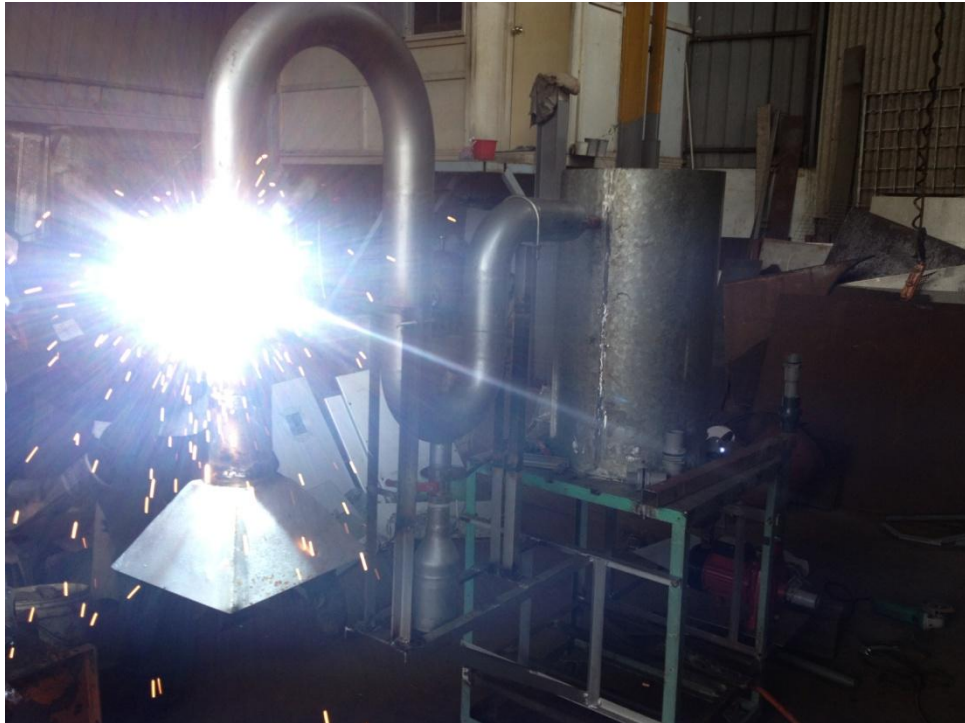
Chimney and inlet of cooling tower welded together
